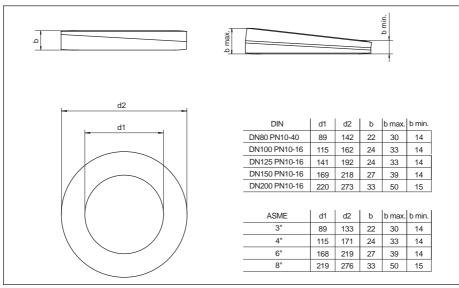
Dimensions variable seal according to DIN EN 1514-1
